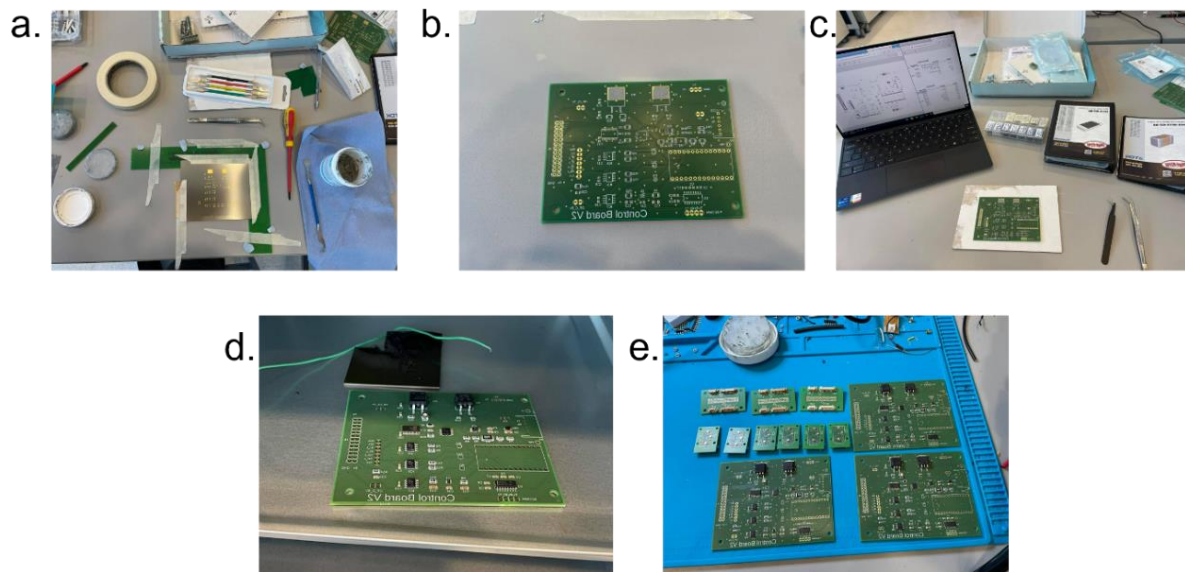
Surface mounted components placement and reflow process (a) applying solder paste to board using stencil (b) PCB with solder paste applied (c) component placement d.) components placed and PCB placed in reflow oven for reflow soldering e.) completed reflow soldered surface mount components onto PCBs.
